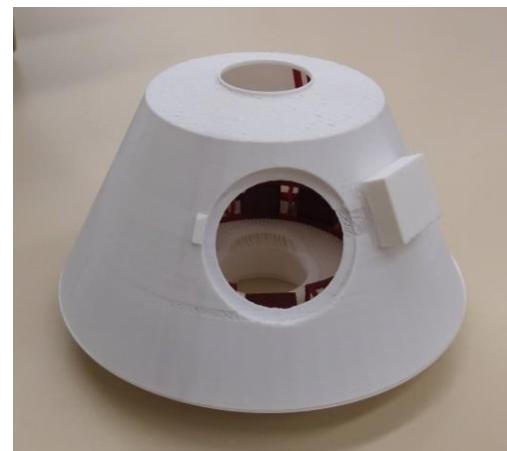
Full 3D printed assembly of the SOEPSS inside of the Almaz capsule
